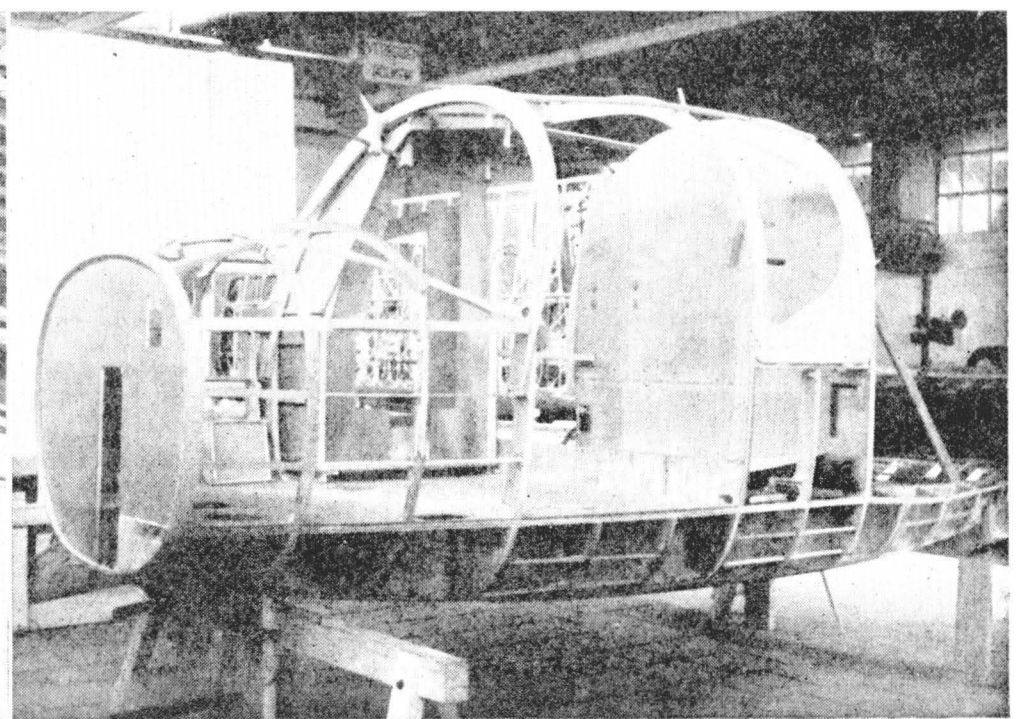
This photograph shows the prototype fuselage assembled before skinning; the keel members in particular should be noted
